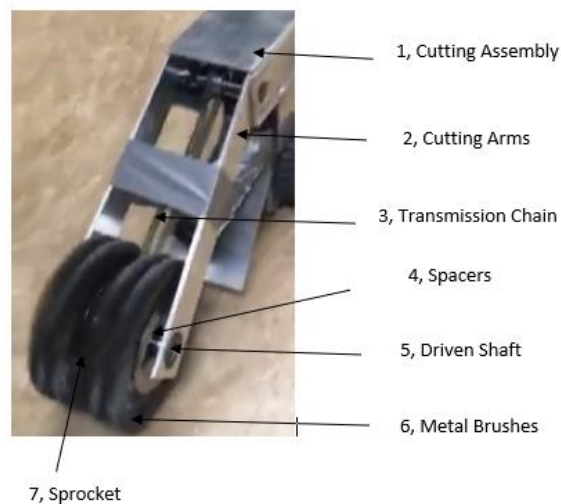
Fabricated cutting arms of prototype 1 with 6” metal brushes
